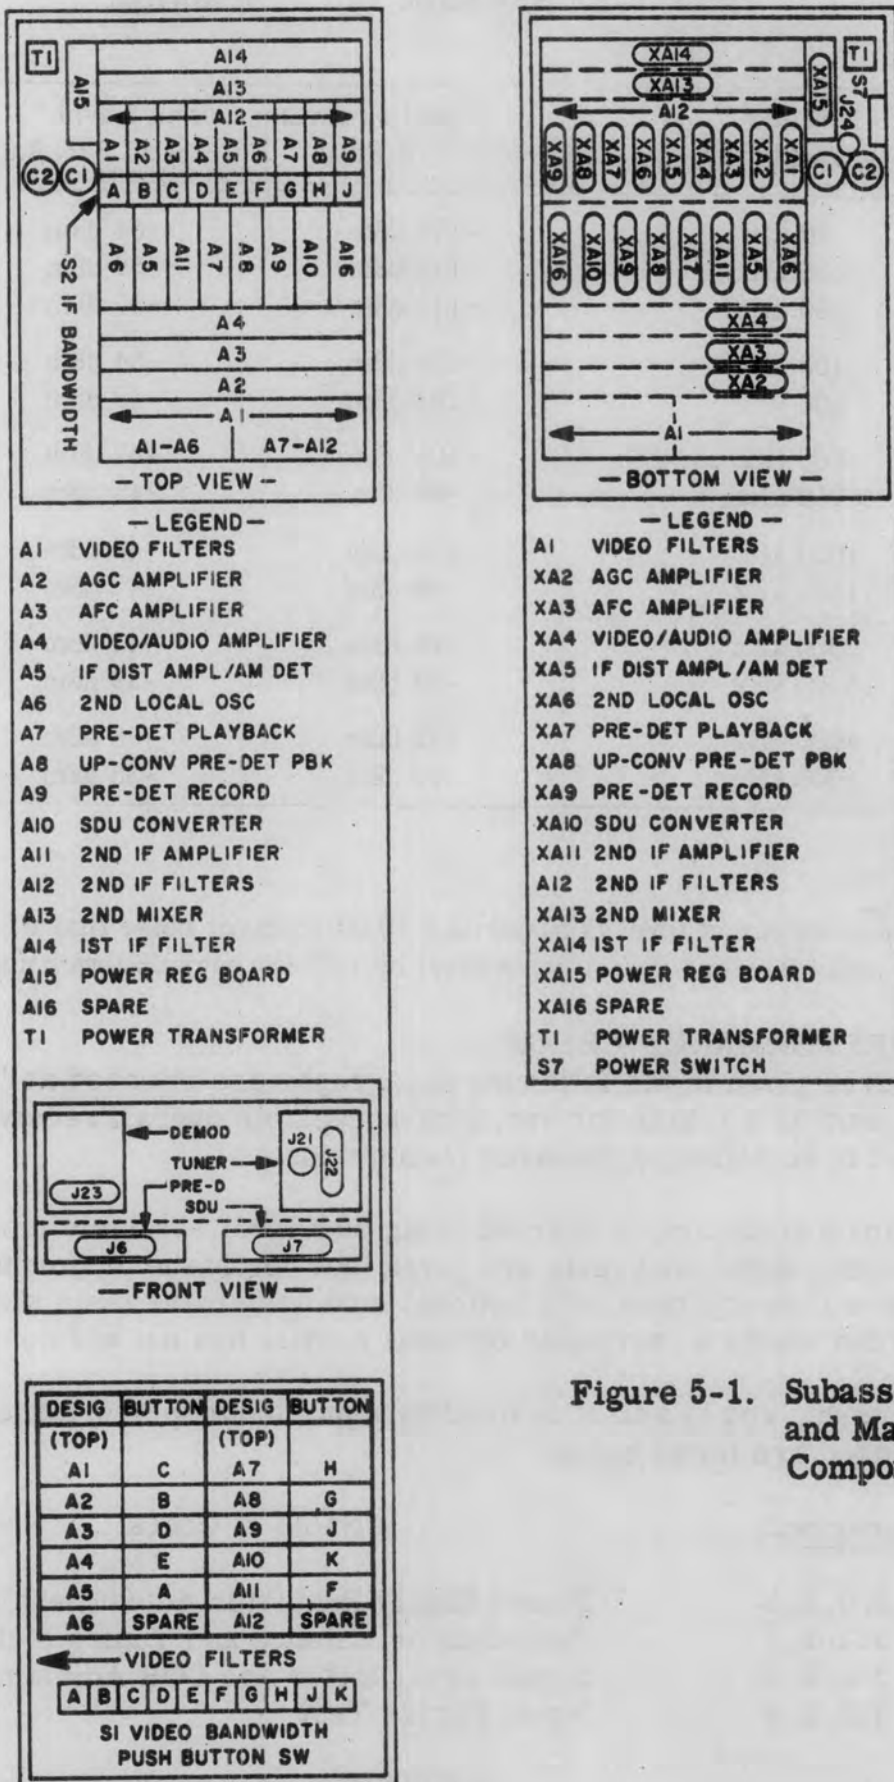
Subassembly, Module, and Main Chassis Component Locations
